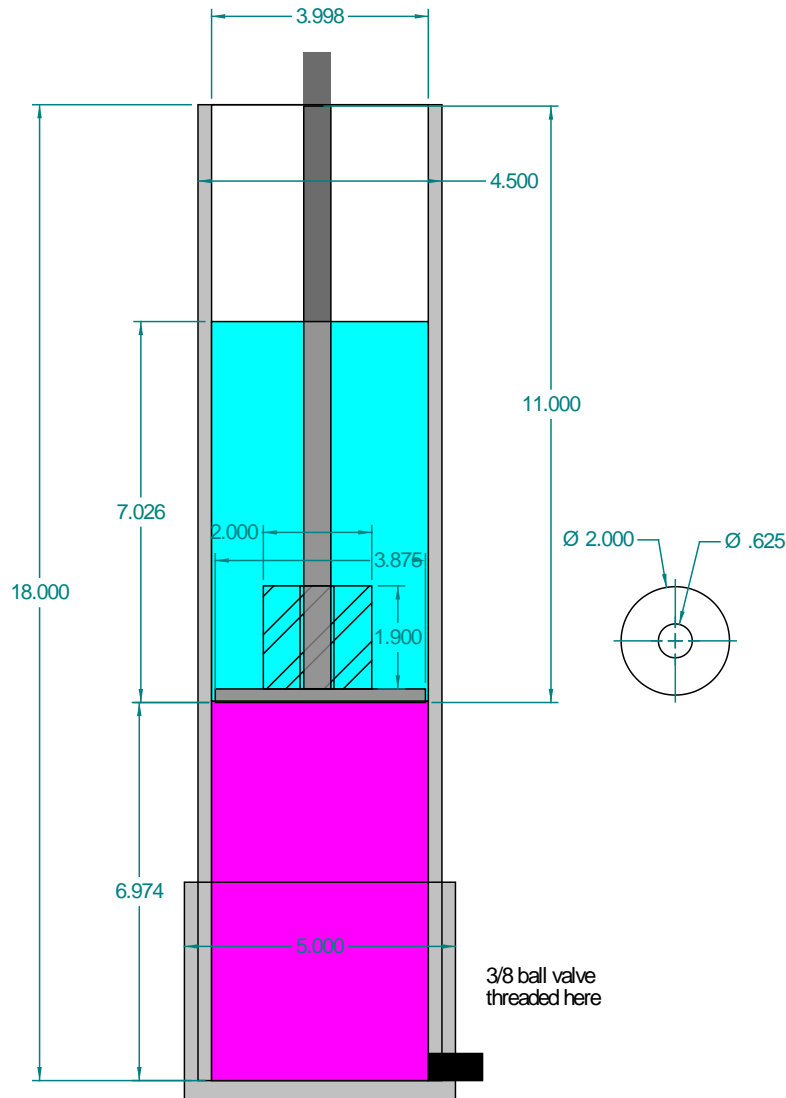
Design drawing of 4-inch IXC. The dimensions are in inches.
